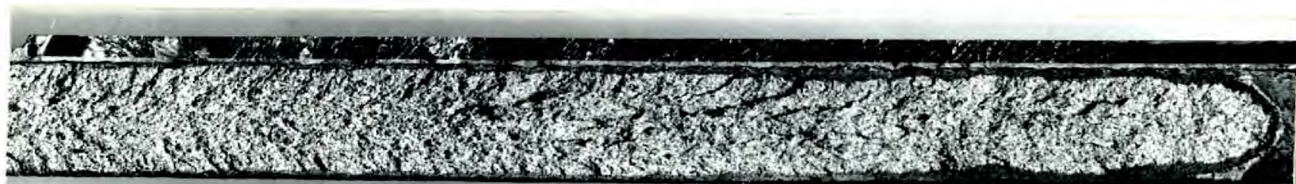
Fracture surface corresponding to fig. 7.15. Scale full size.
